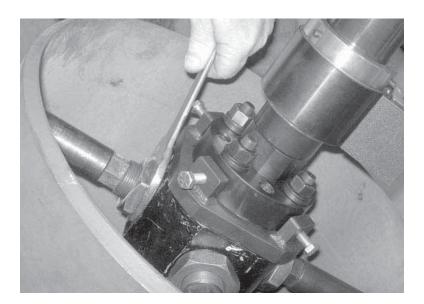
When the chuck is rough centered, snug the jam nuts to hold the clamping legs in place.
